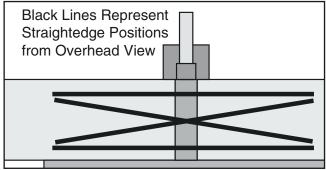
Straightedge positions for checking infeed/outfeed table parallelism.
